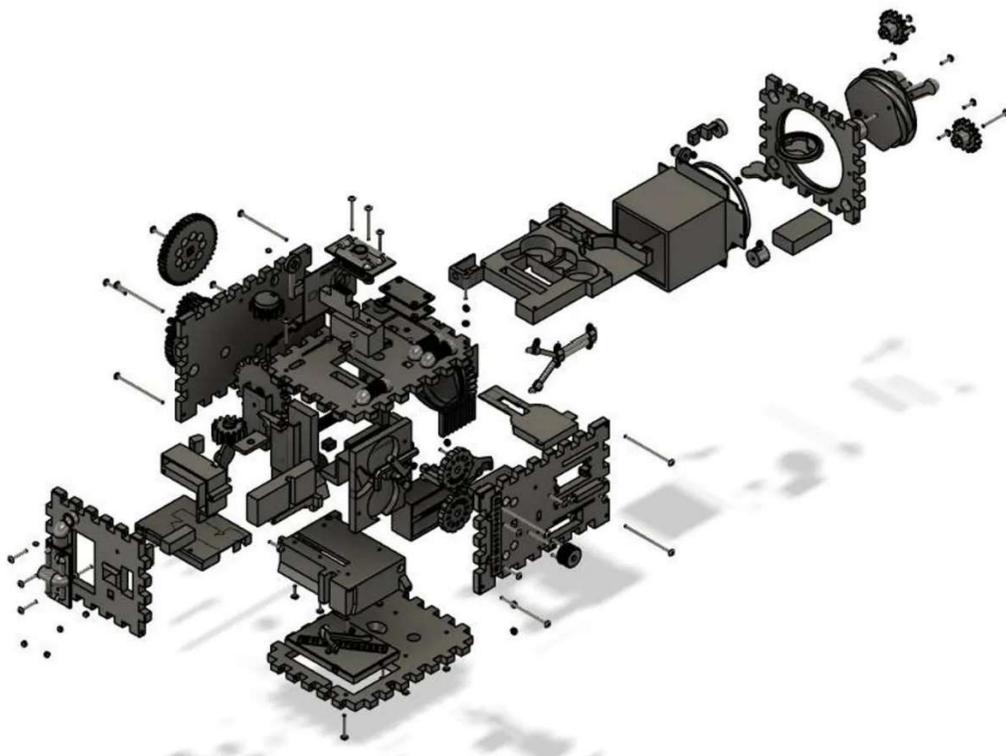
Exploded View of the Steam Machine Puzzle Box
